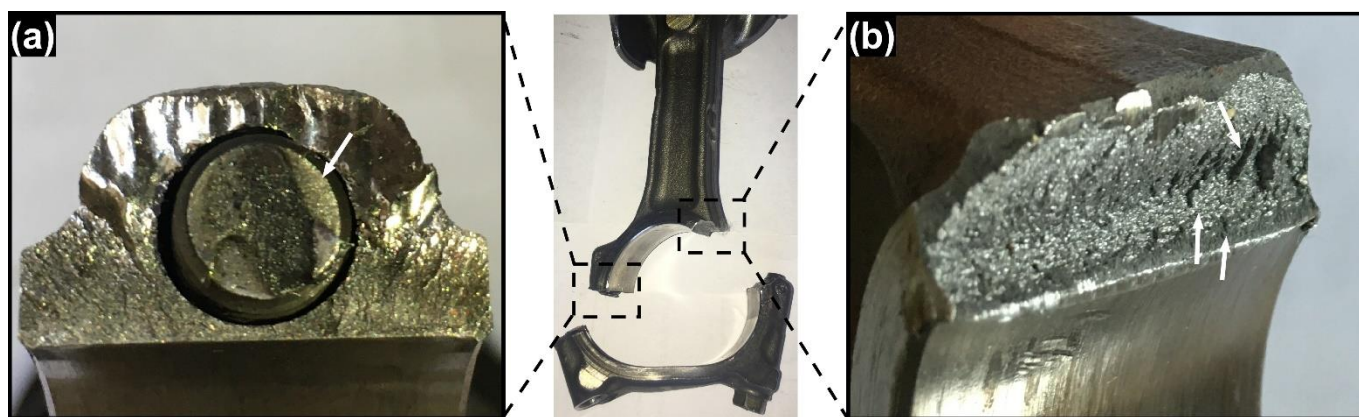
Macrostructure of damaged zones. (a) fracture surface of the remaining part of the broken left side bolt and (b) fracture surface of the broken right side shoulder.
